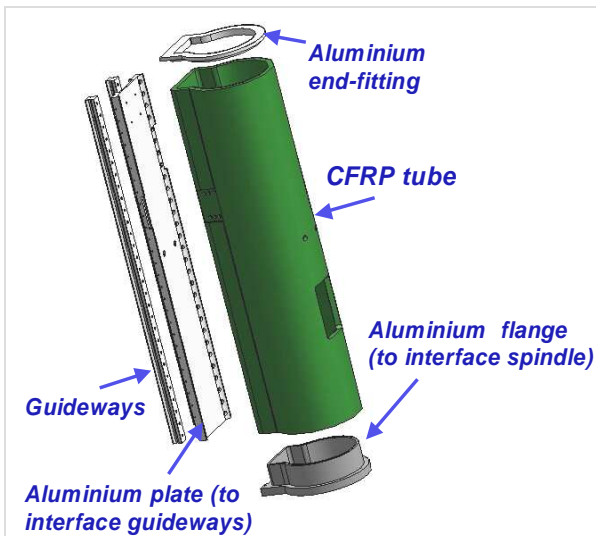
Machine tools part (Ram) made in CFRP with metallic end-fittings
